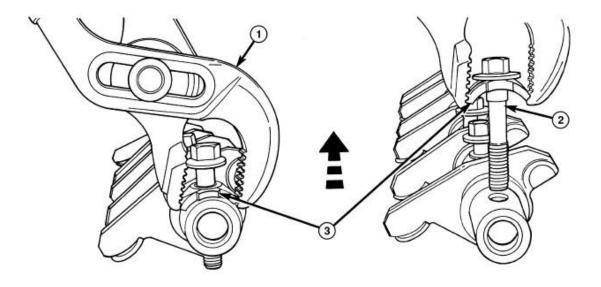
ROCKER ARM RETAINER - REMOVAL Courtesy of CHRYSLER LLC
